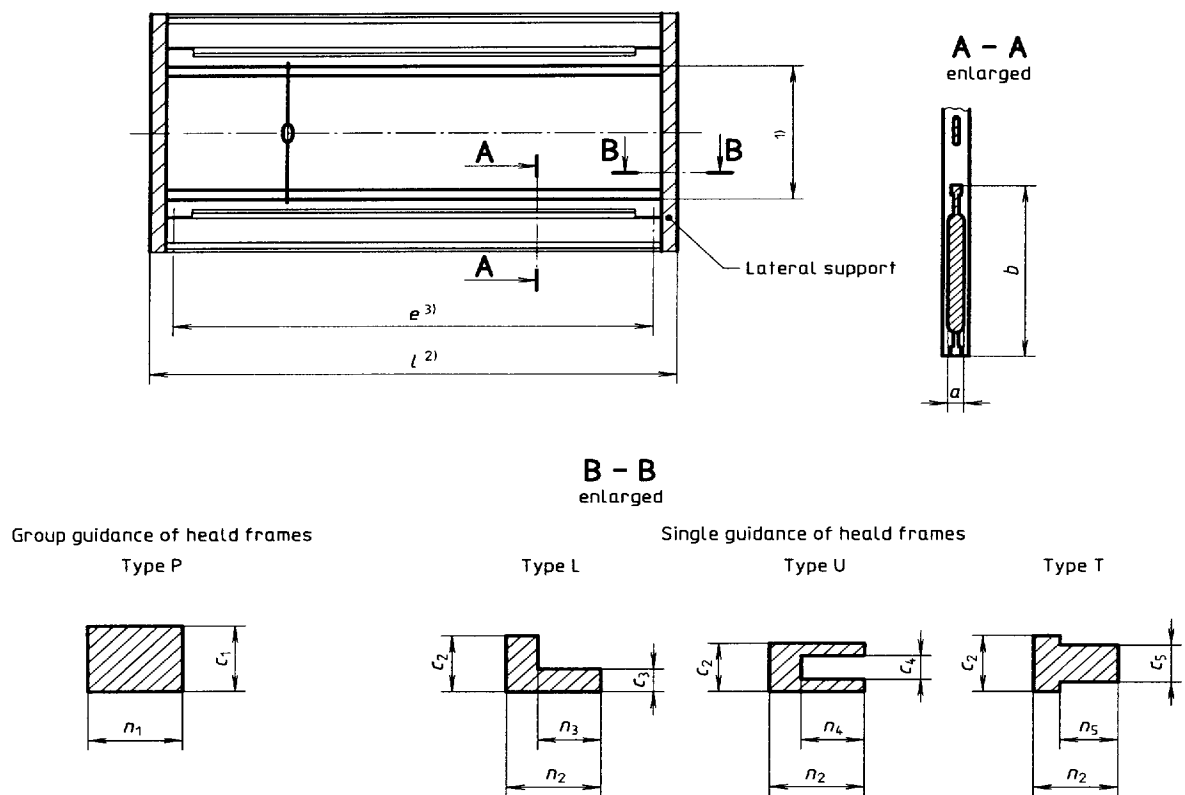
and 2 and table 1 define and specify the dimensions of heald frames on which the heald-carrying rod is fixed to the frame stave by rod support.
